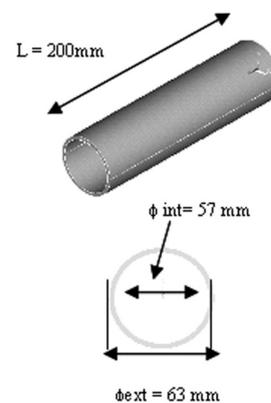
Dimensions (in millimeter) of samples of the test tube for the impact test
